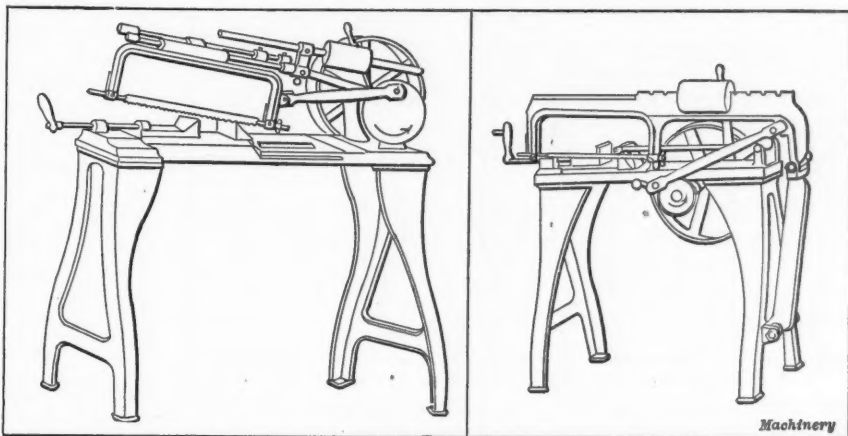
The Star, the First Type of Hacksaw Machine. Fig. 2. The Simplex, another Early Type
